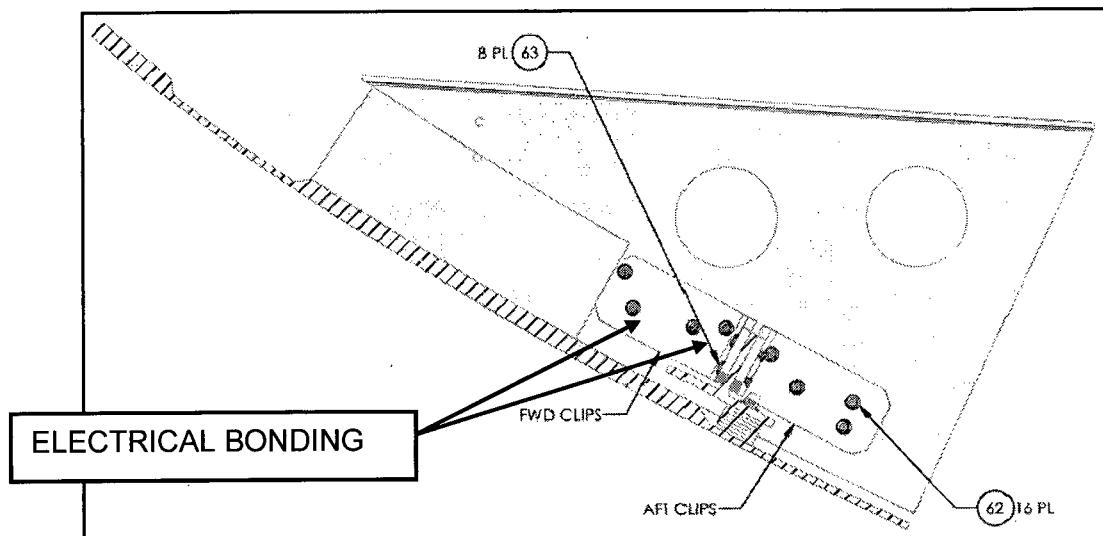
Rivet Locations on Airframe for Aft Intercostal Assembly
